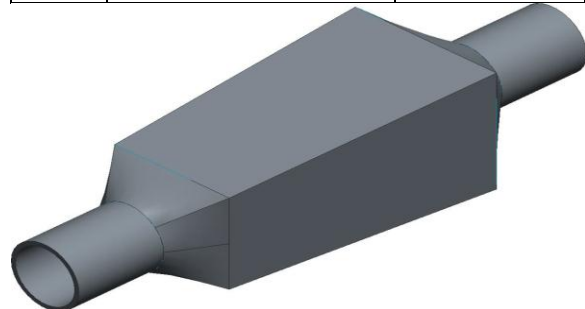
Three Dimensional View of Rectangular Heat Exchanger.
